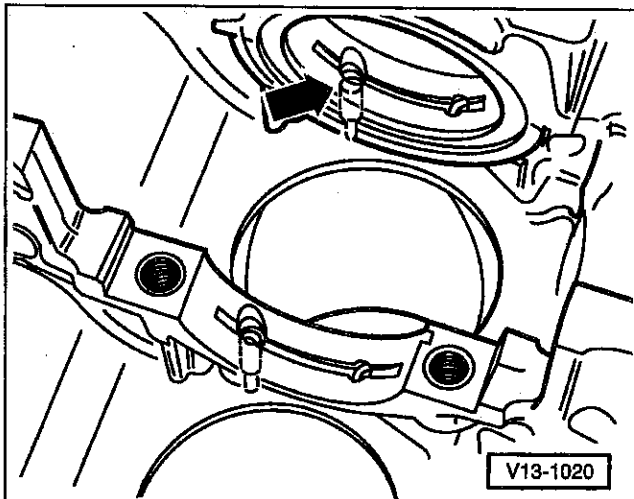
Oil spray nozzles for each piston are fitted above main bearing caps (arrow) on VR6 engine.
